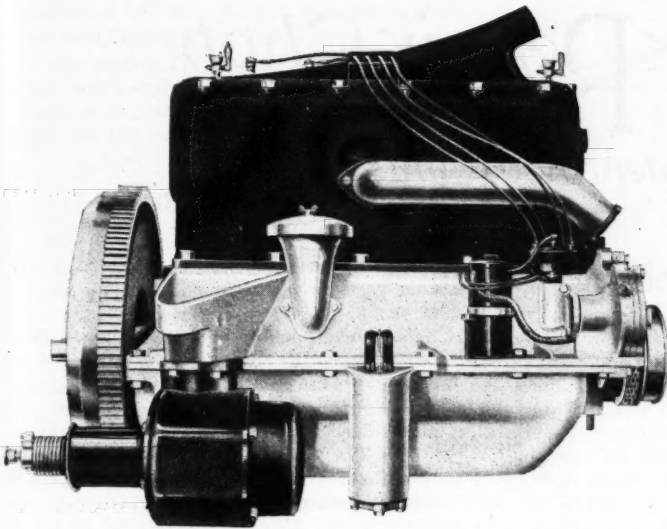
Auto-Lite starting motor and ignition system installed on 1917 Overland engine
